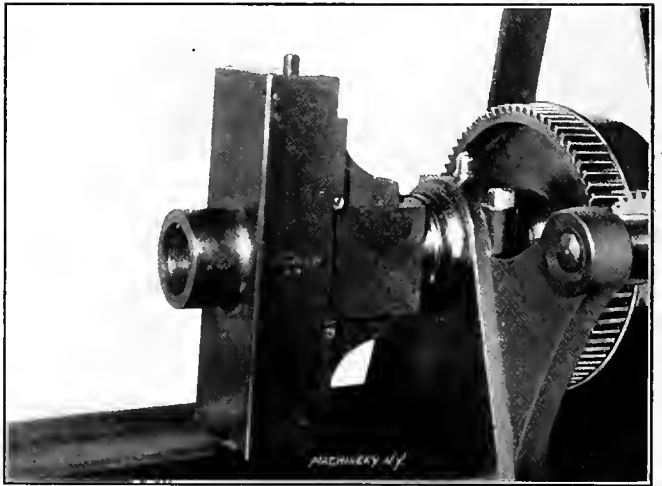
The Way in which the Chuck is held when cutting the Thread and finishing the Boss.
